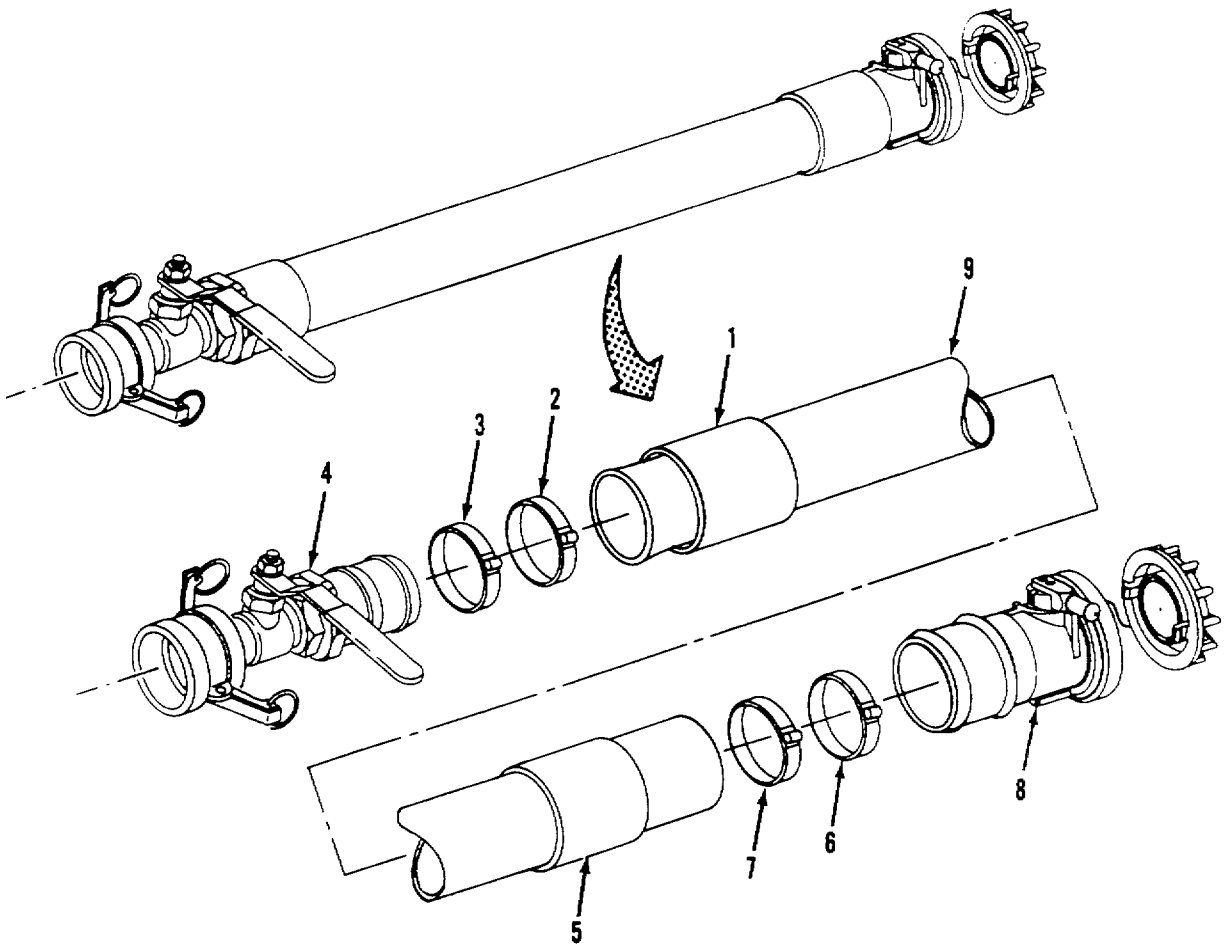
3-Inch Fuel Hose Disassembly.
